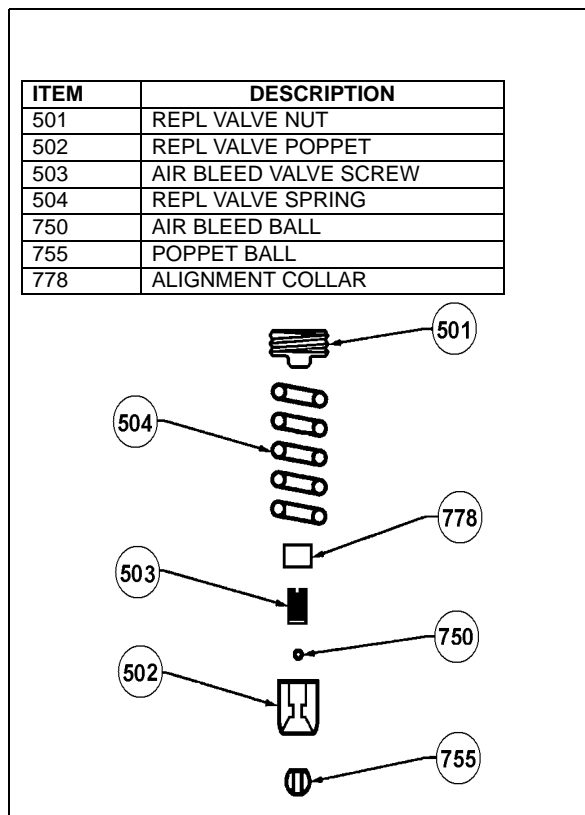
Pressure Relief/Air Bleed Assembly (Size B & C).
